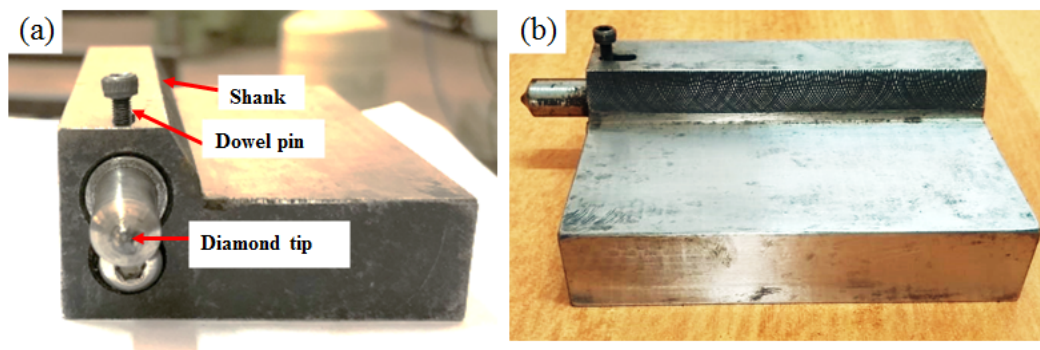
A novel diamond burnishing tool (a) Front view, (b) Side view.
